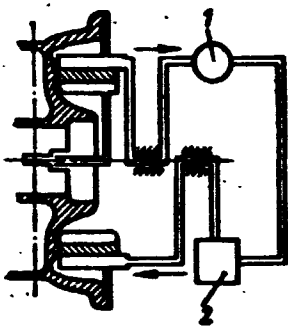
Schematic of forced brake cooling system using circulating coolant.
